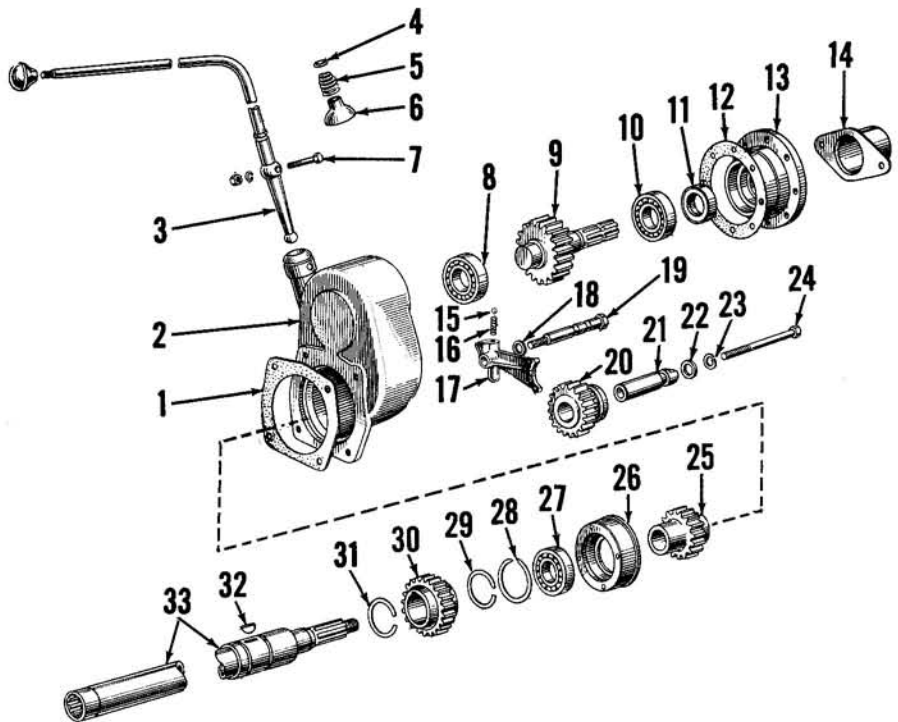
Exploded view of typical raised PTO drive unit. Unit raises PTO output shaft to within ASAE specifications as measured from drawbar hitch point.
